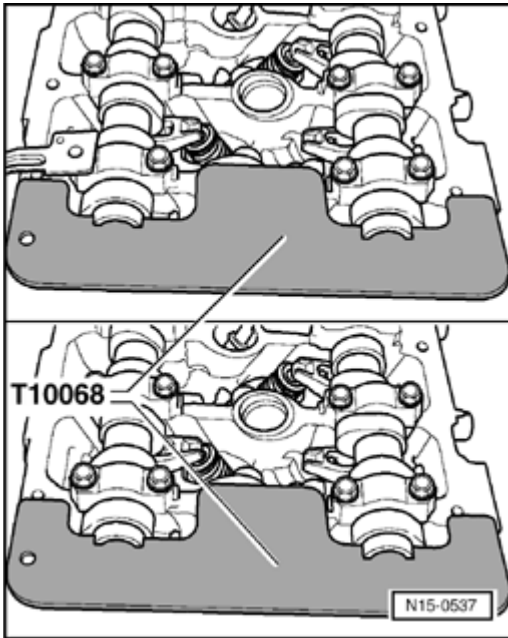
Camshaft Bar T10068 Engaging In Both Shaft Grooves
